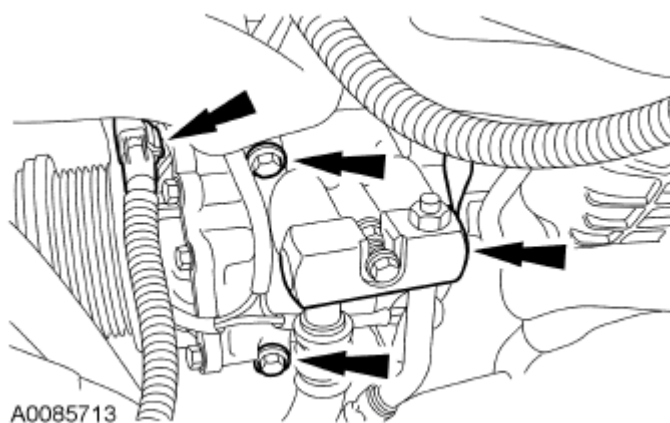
Locating A/C Compressor Electrical Connector And Bolts
